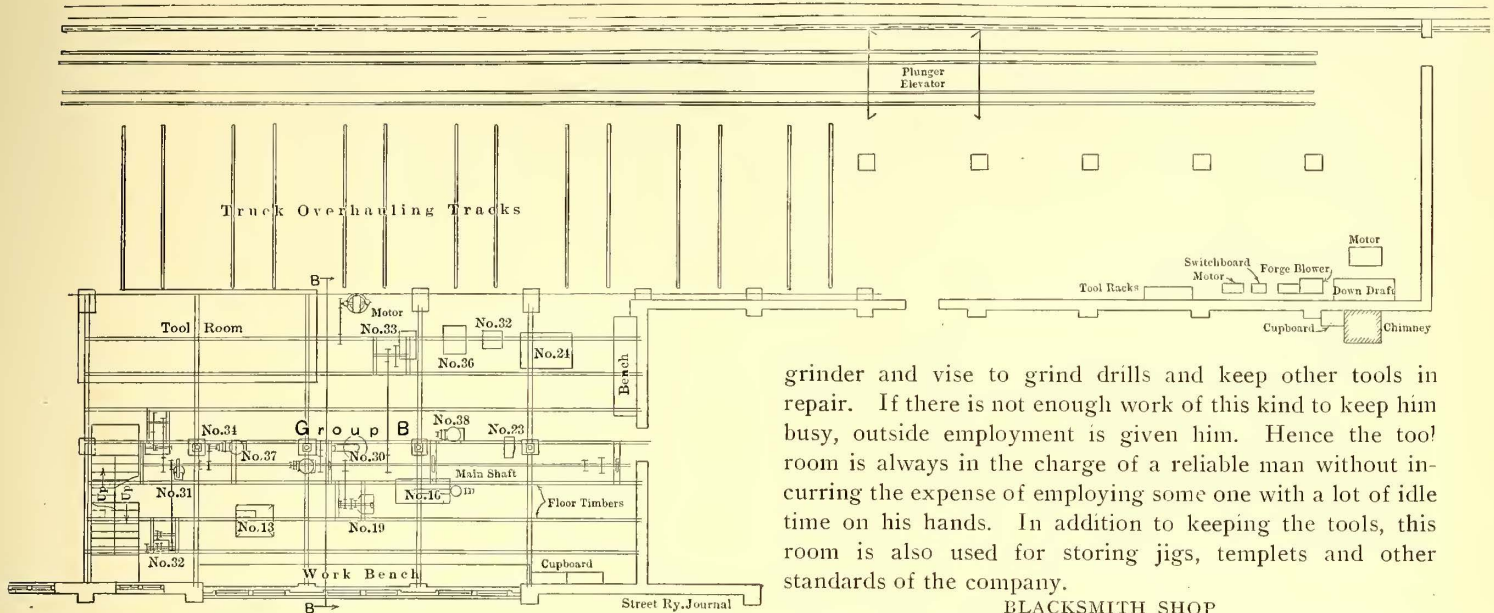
(CONTINUED).—PLAN OF SECOND PART OF MACHINE AND TRUCK OVERHAULING SHOPS, SHOWING GROUP-DRIVEN TOOLS, TRUCK-OVERHAULING TRACKS, ELEVATOR, TOOL ROOM, ETC.
